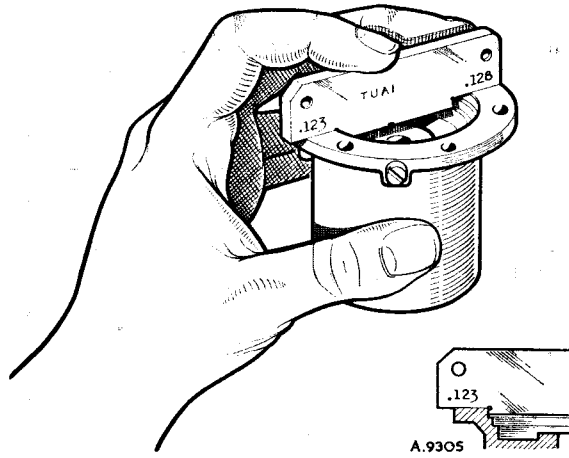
Checking the depth of coil housing step using gauge TUA 1
